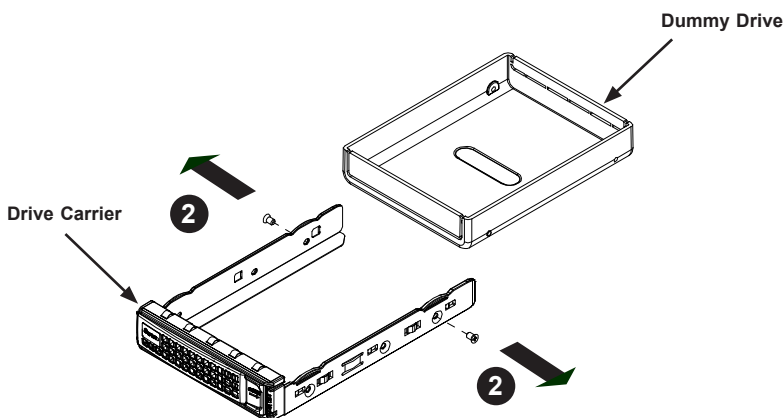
Removing a Dummy Drive from the Drive Carrier
